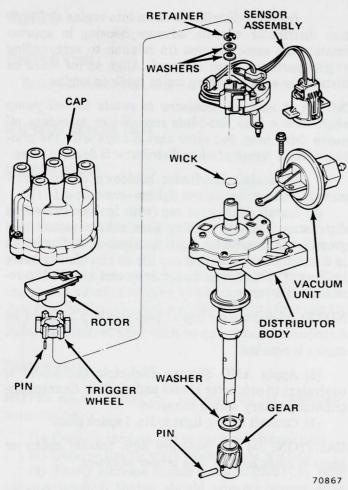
G-14 SSI Distributor Components—Six-Cylinder Shown
